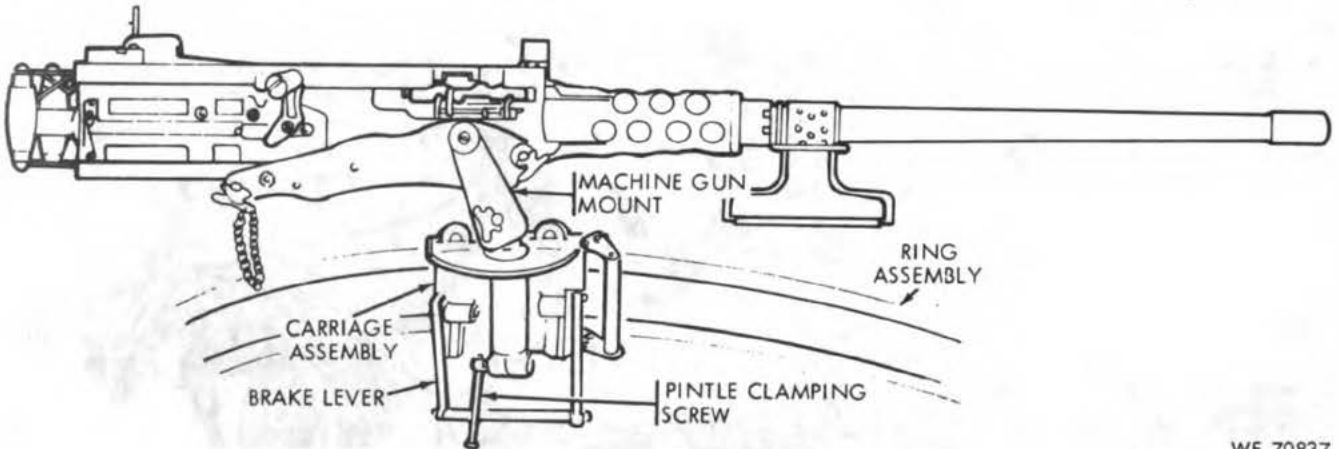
Controls for carriage assembly M49 series solid ring.
